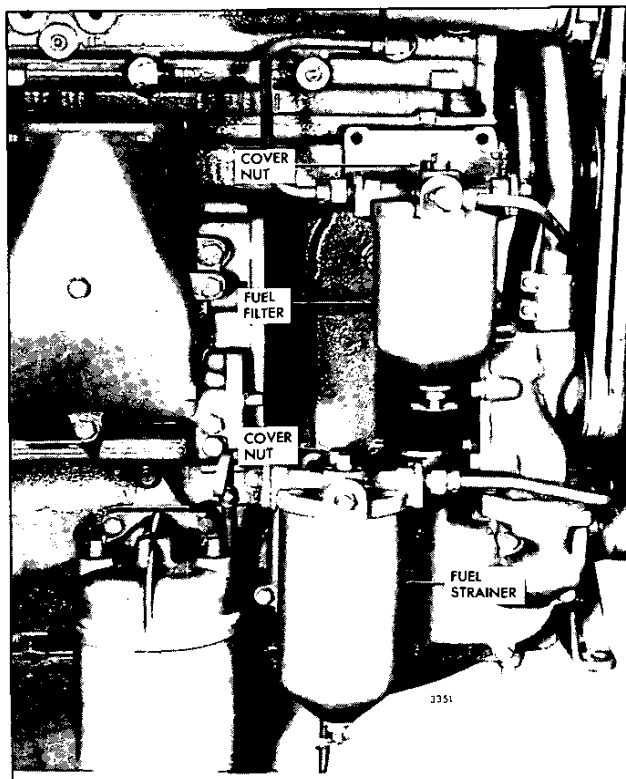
Typical Fuel Strainer and Fuel Filter Mounting
